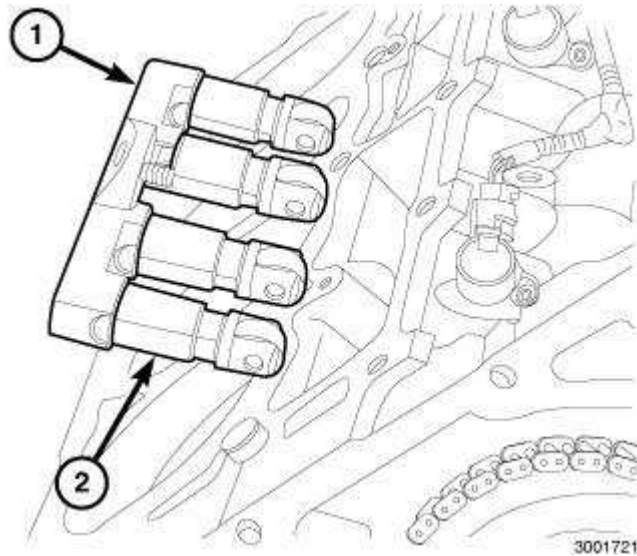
Hydraulic Lifters/Tappets & Retainer/Guide Holder
